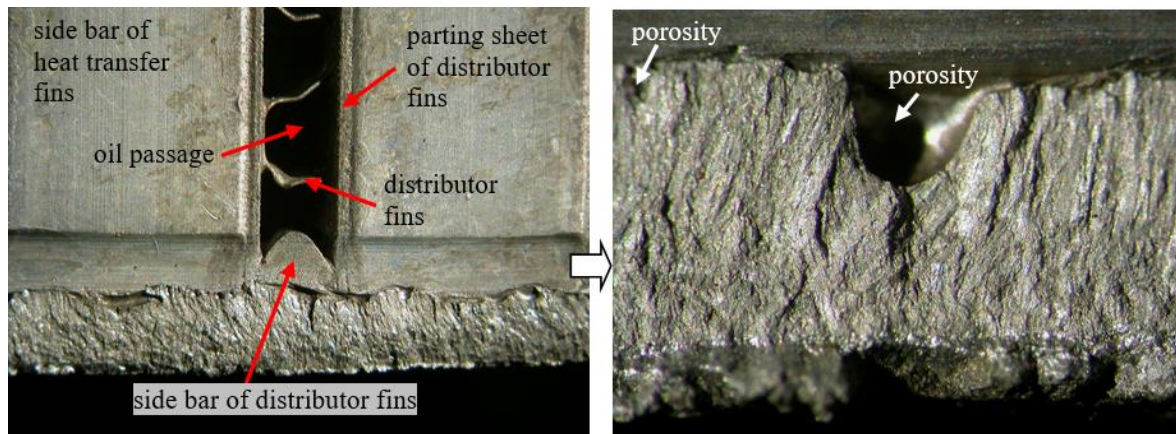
Fracture surface of the weld joint between header and sidebar/parting sheet
